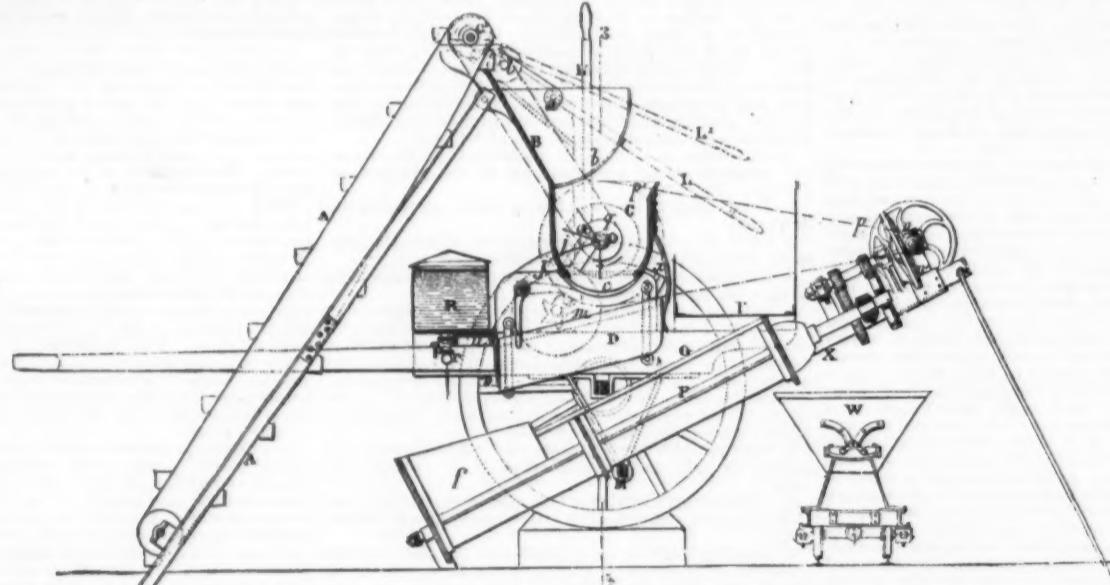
LONGITUDINAL SECTION AND ELEVATION.
